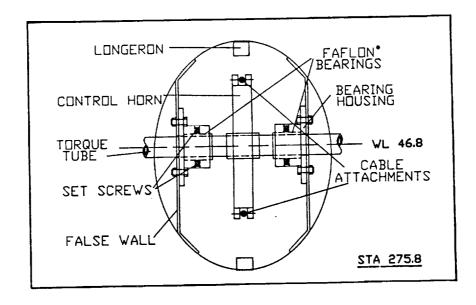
Front View of Elevator Control Horn Mounting (STA 275.8)
